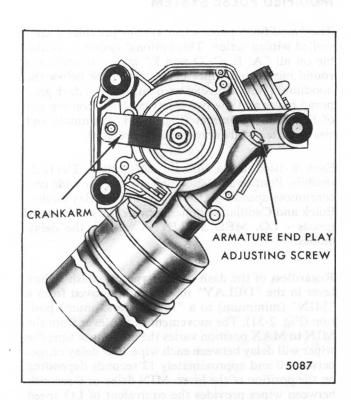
Wiper Motor and Crank Arm in Park Position
